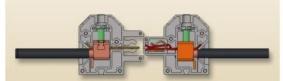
Sectional View of Plug and Socket Terminal PS 8M
